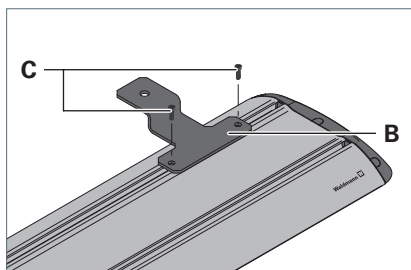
Mounting the bracket for mounting type "Top, fixed", 2nd option.
